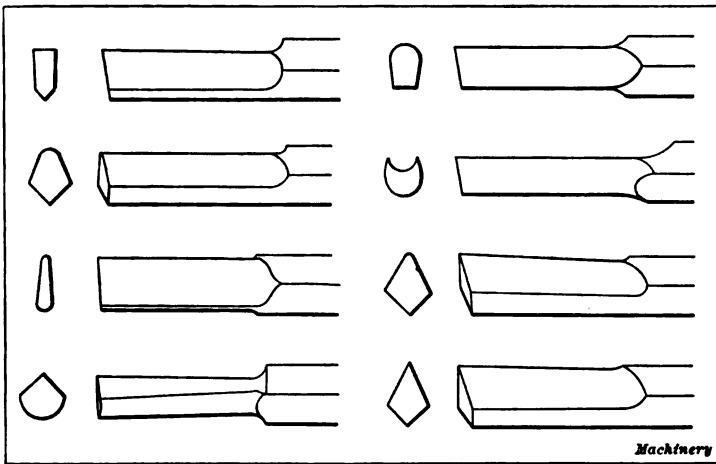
Set of Slotting Tools for Universal Shaper Illustrated in Fig. 14
